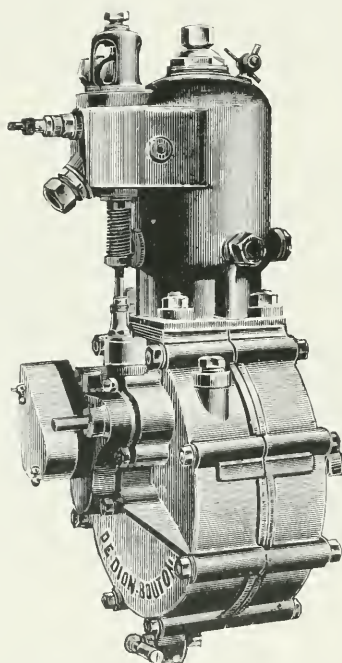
DE DION-BOUTON ONE-CYLINDER MOTOR.
